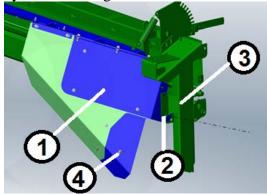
Forming Shield Installation Key 1 – Support Plate Key 2 – Mounting Location Note: reuse original hardware Key 3 – Header frame
